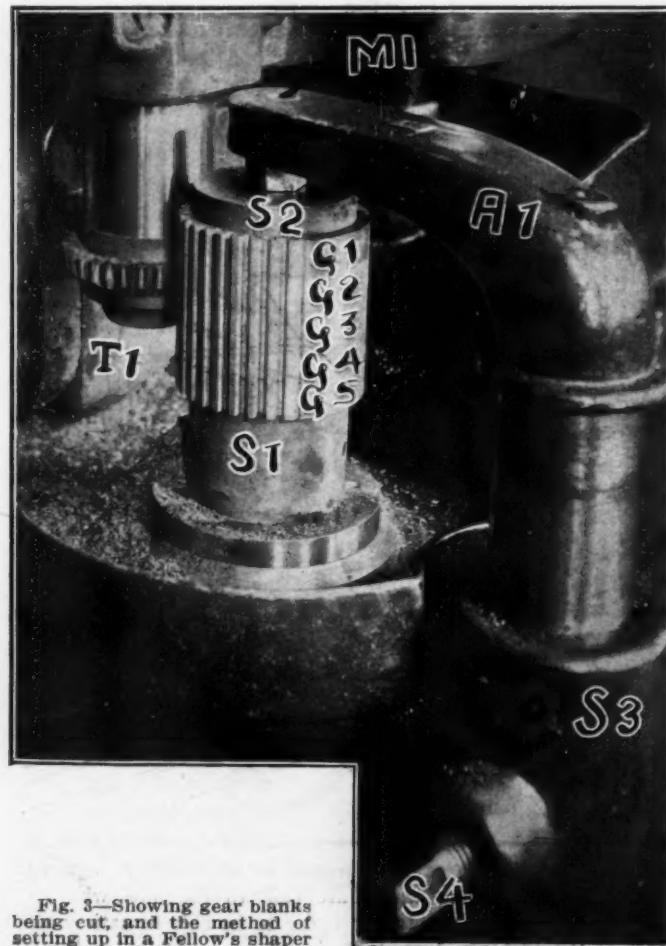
Showing gear blanks being cut, and the method of setting up in a Fellow's shaper
